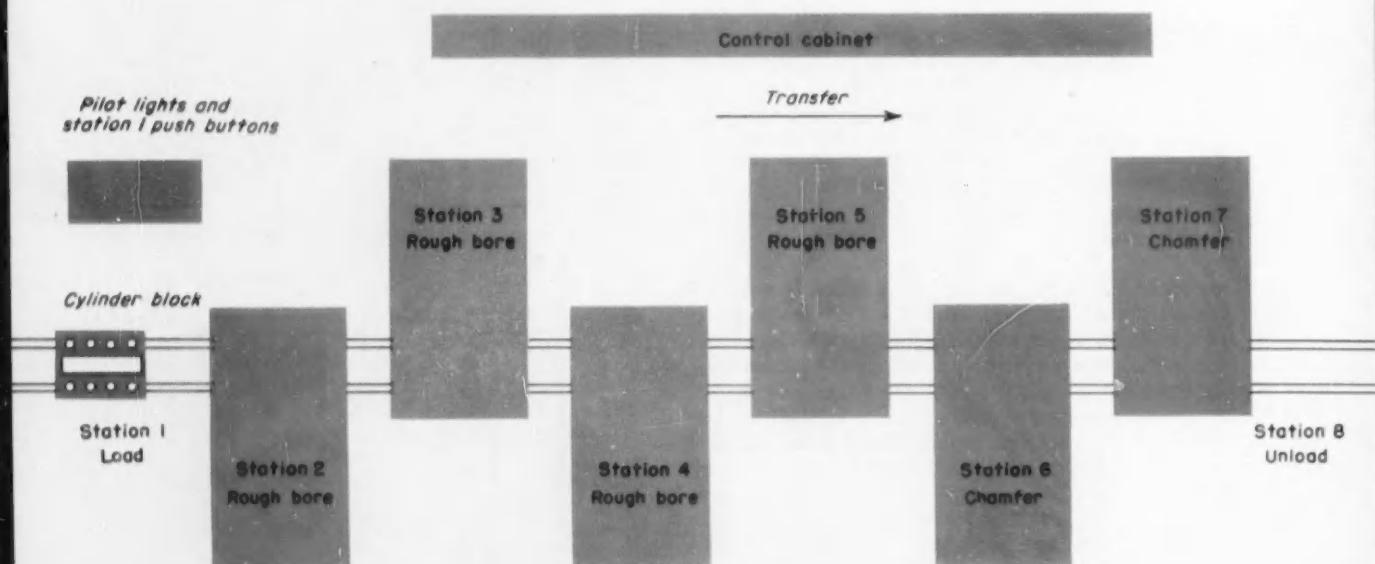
Schematic diagram of six-head transfer machine shown in Figure 2.
